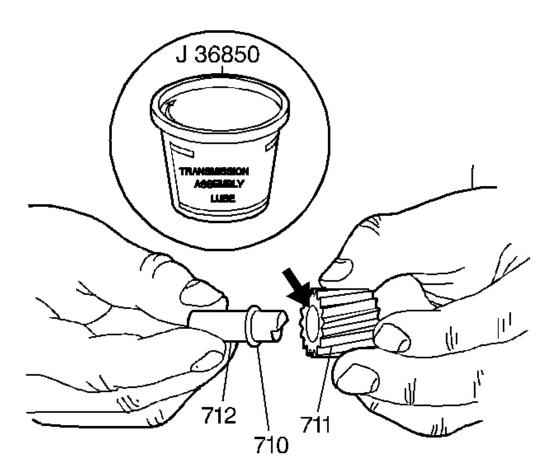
Inserting Bearing Roller Spacer Onto The Pin Planetary Pinion Gear Courtesy of GENERAL MOTORS CORP.
